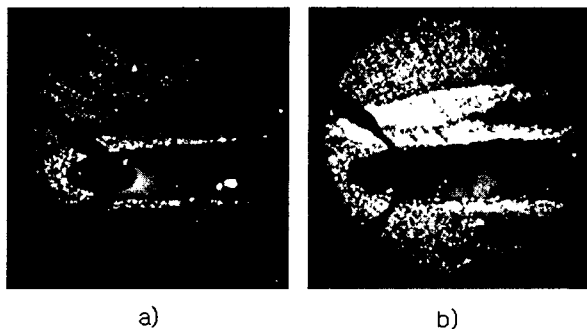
Photos of metal transfer in hybrid welding; a) 100% He, b) 60% He+40%Ar.
